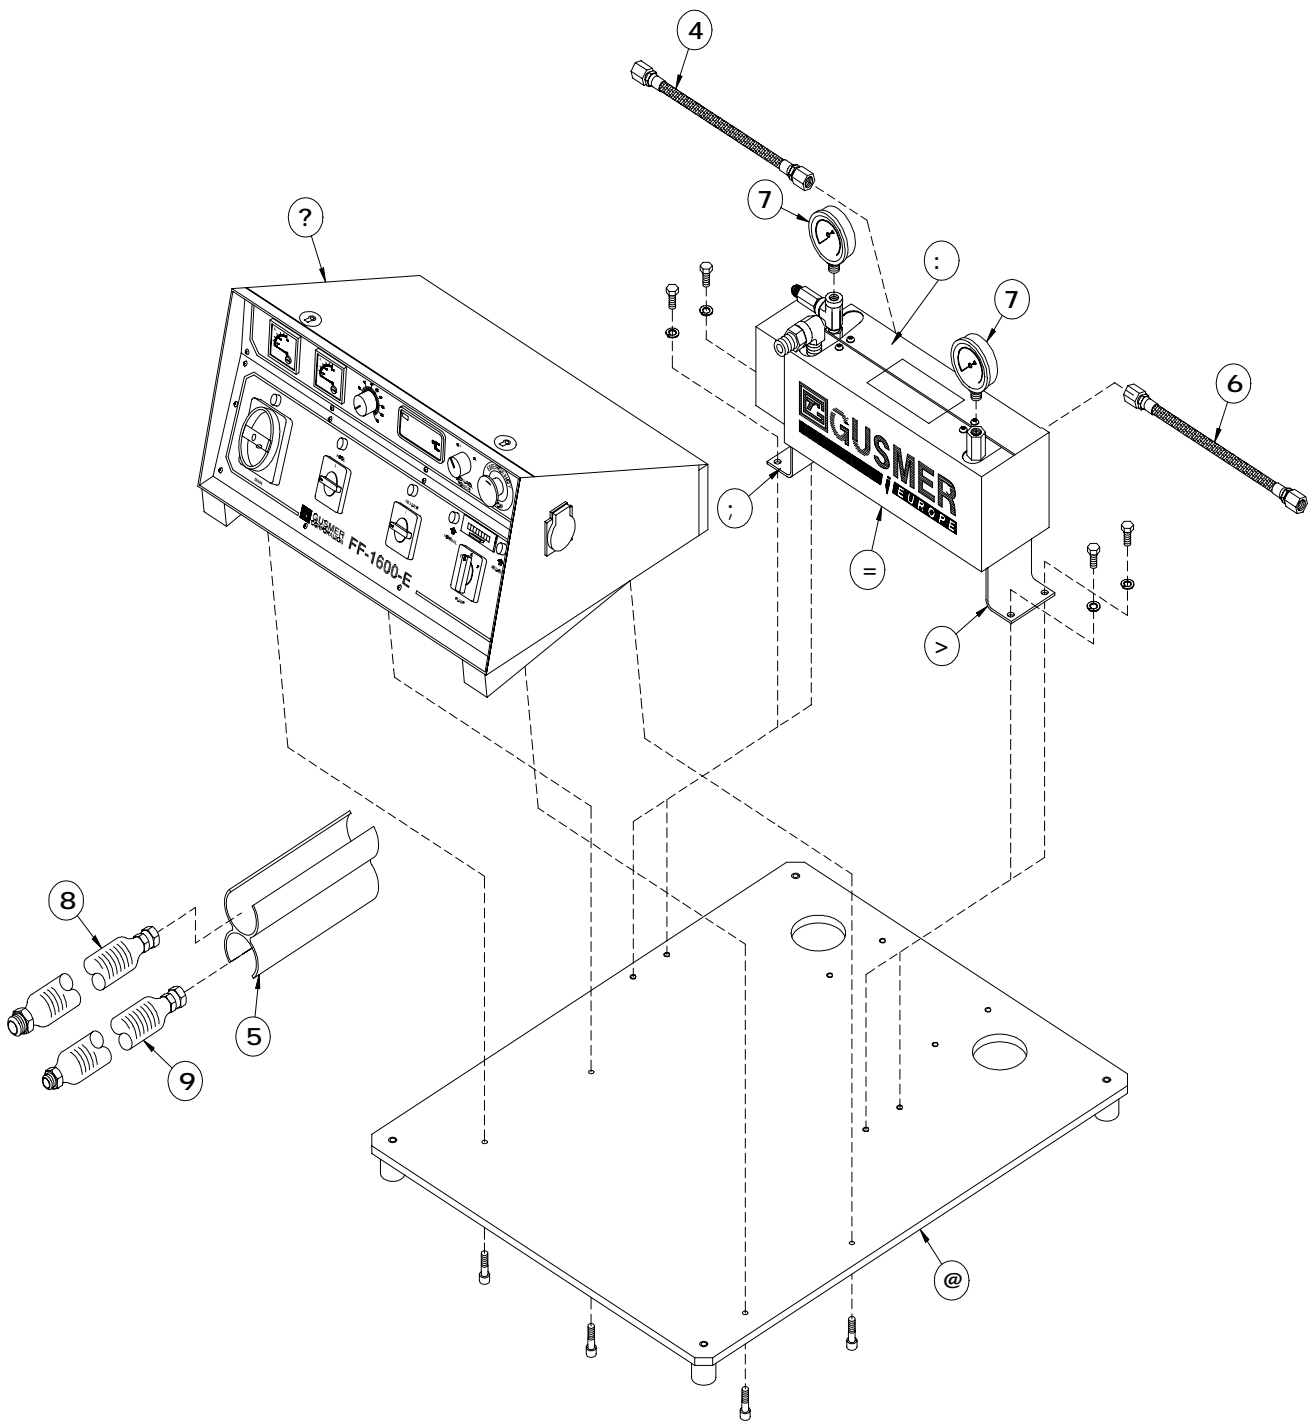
FF1600-E Final Assembly, Exploded View, Sheet 1 of 2
